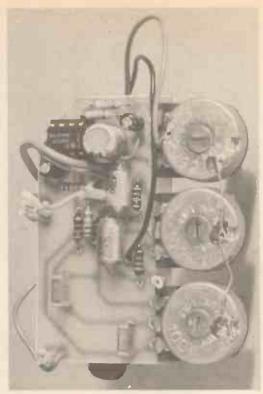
Main p.c.b. layout and wiring. These boards (EE554/5) are available from the EE PCB Service.
